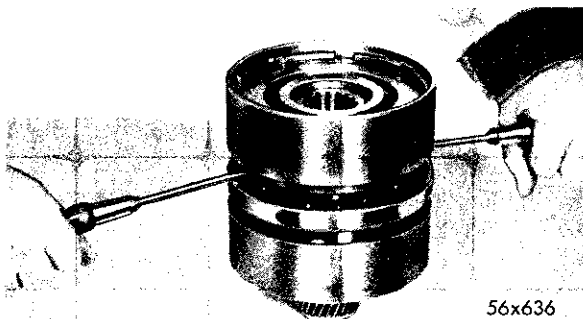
Removing Rear Clutch Piston Retainer Assembly from Sun Gear
